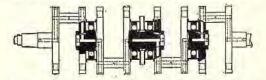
A ball-bearing, built-up type of crank shaft with bearings for a four-cylinder racing engine. With three or more bearings it is necessary to have a built-up crank shaft in order to mount the ball bearings. On engine there are two ball bearings placed on the outer bearing ends of the crank shaft. Thus a solid ball-bearing crank shaft can be used. See Index under "White 1-ton truck."
